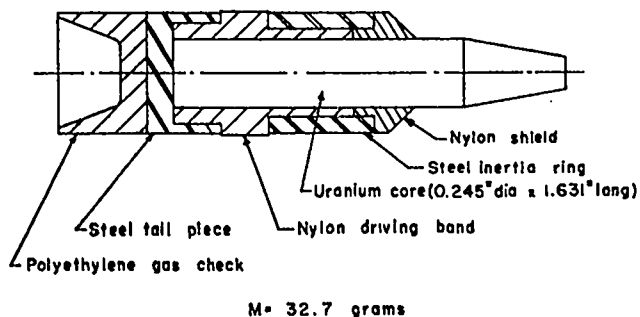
The .50-caliber test projectile and uranium penetrator core.
